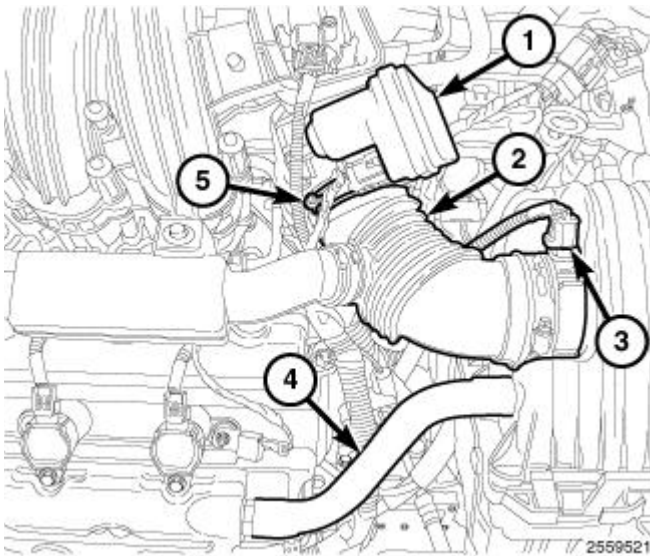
Identifying Air Makeup Hose, Throttle Body & Air Inlet Hose
